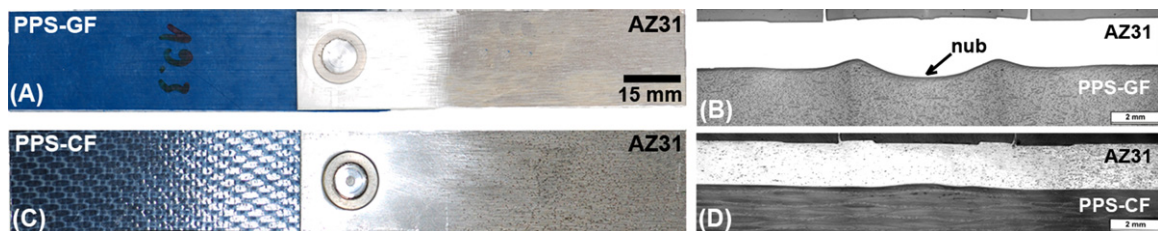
(A) Surface appearance of a PPS-GF/Mg AZ31 single lap joint (3000 rpm, 0.25 mm, 8 s, 2 bar); (B) cross-sectional light optical macrograph of specimen in A; (C) surface appearance of a PPS-CF/Mg AZ31 single lap joint (specimen from Fig. 5) and (D) cross-section OM macrograph of specimen in C.
